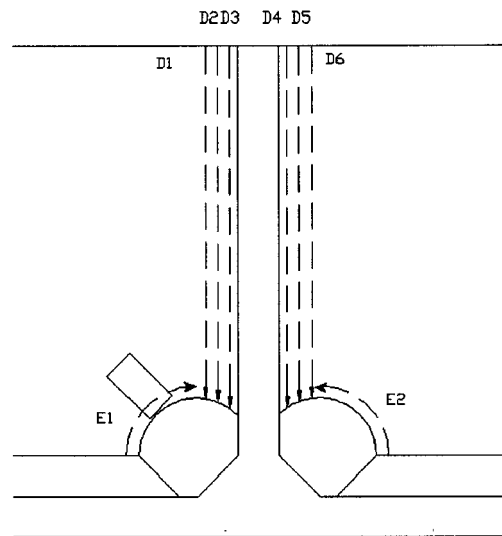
Scans of Vertical Cut Out Weld and Cut Out Surface
